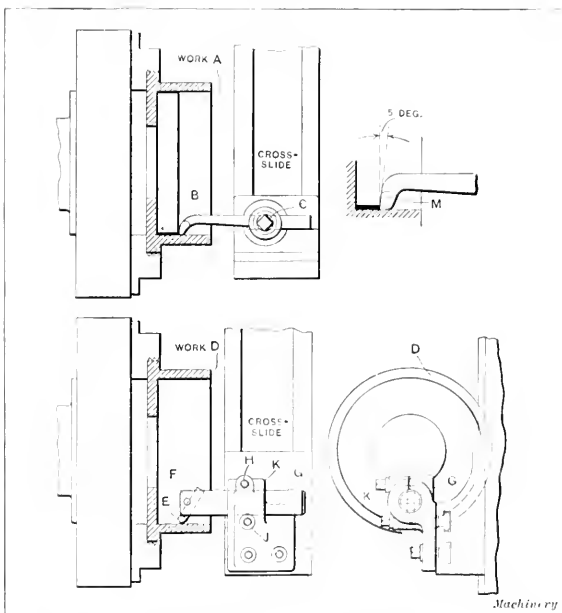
(Upper View) Forged Type of Boring Tool; (Lower View) Boring Tool with Inserted Cutter
